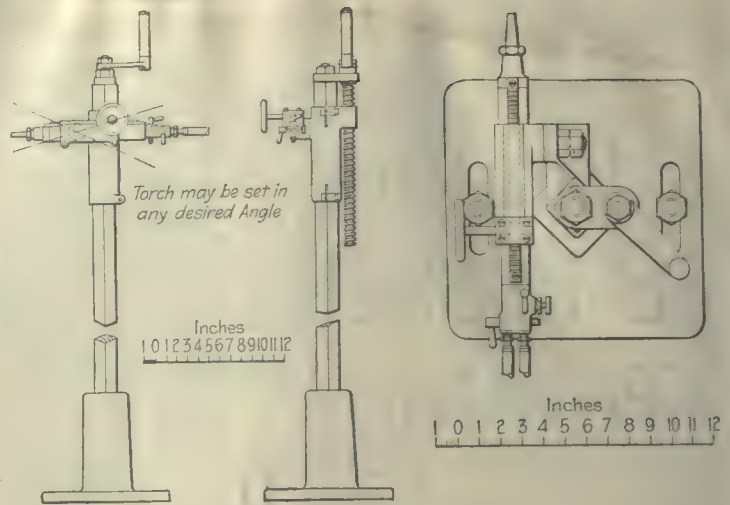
DETAILS OF OXYACETYLENE-TORCH STAND
